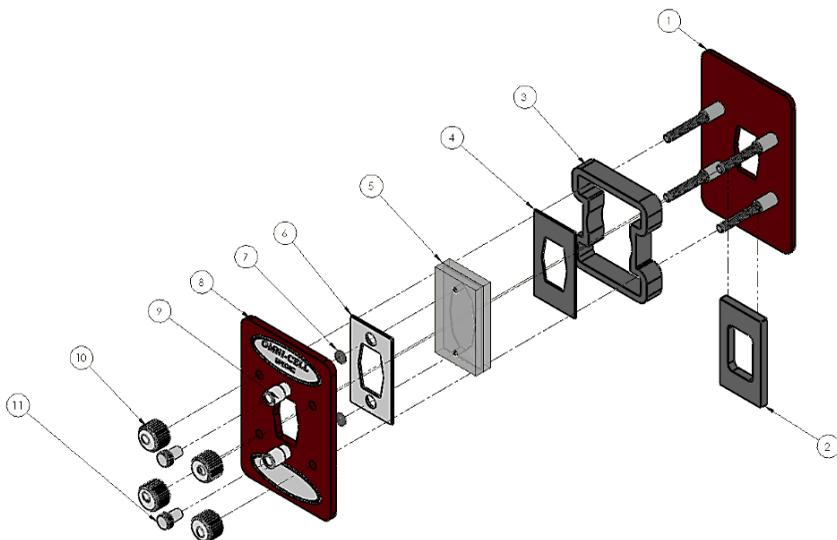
Omni-Cell Assembly (GS01800+GS022XY) exploded view.
